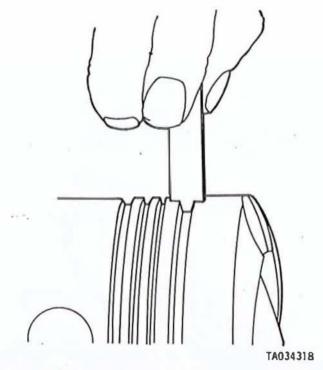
Checking piston top ring groove using tapered groove piston ring gage.
